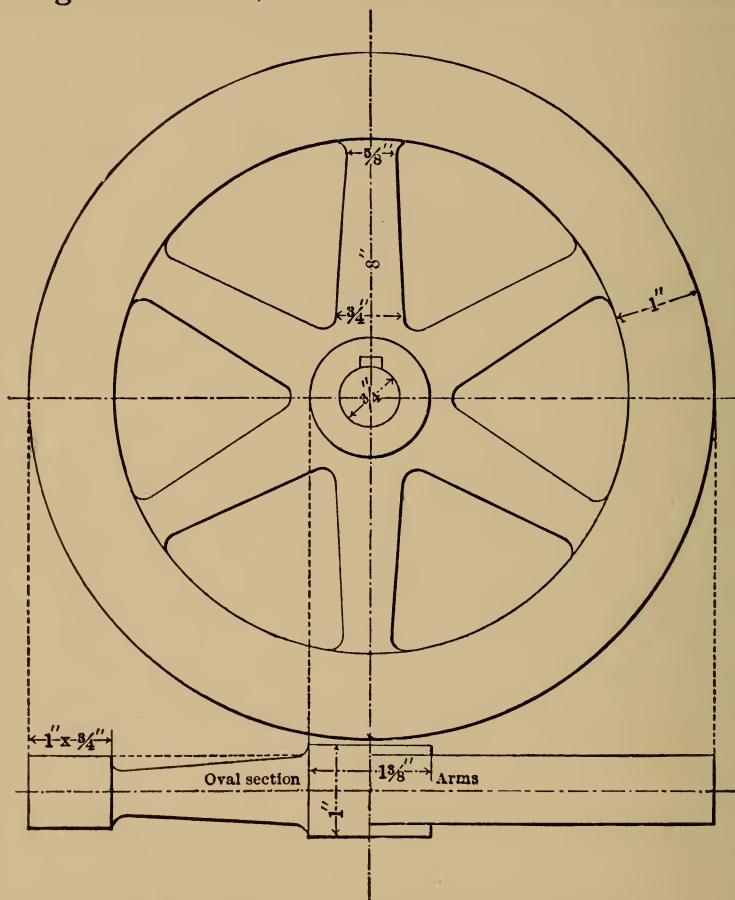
FLY-WHEEL OF HORIZONTAL ENGINE.
